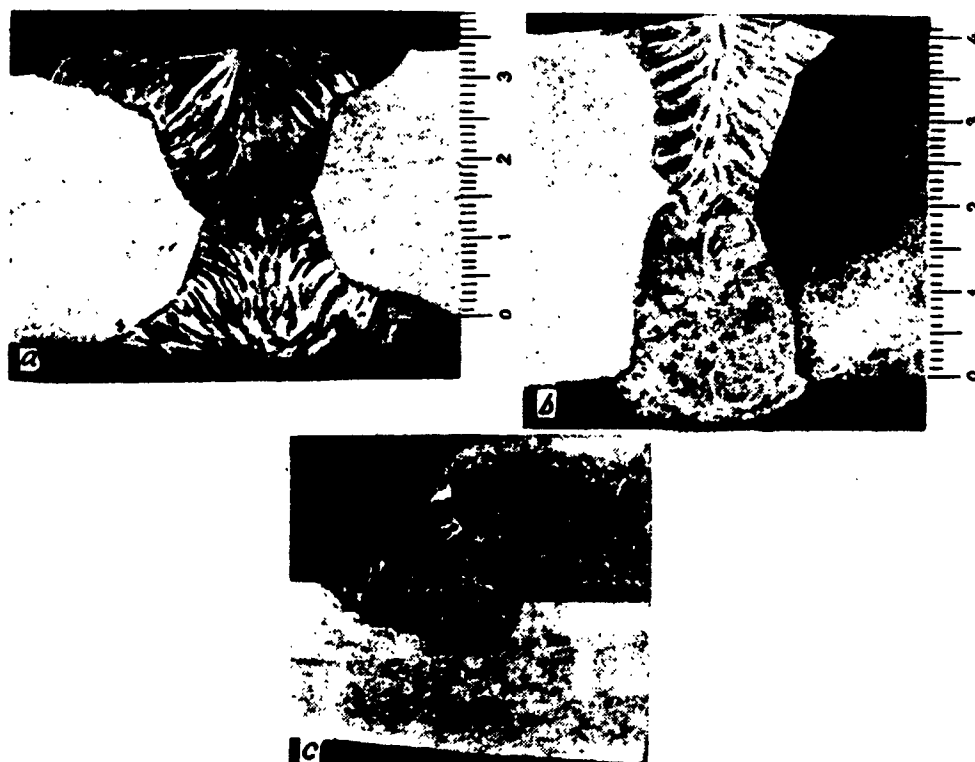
Macrographs of automatic austenitic-steel welds:
